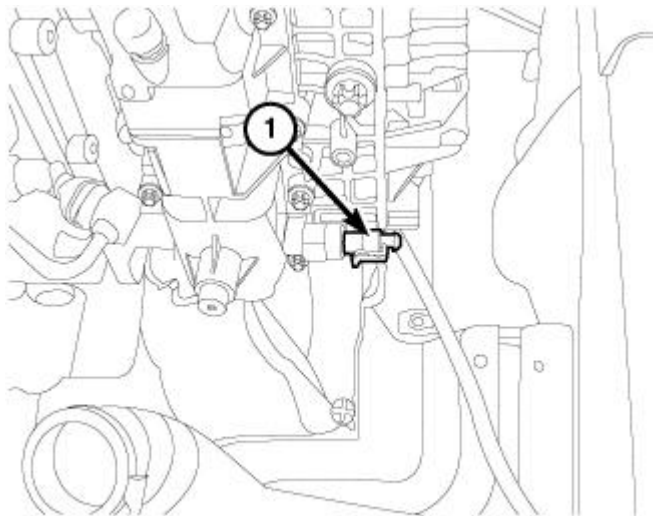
Hose Assembly & Hot Bottle Return Pipe Bolts
